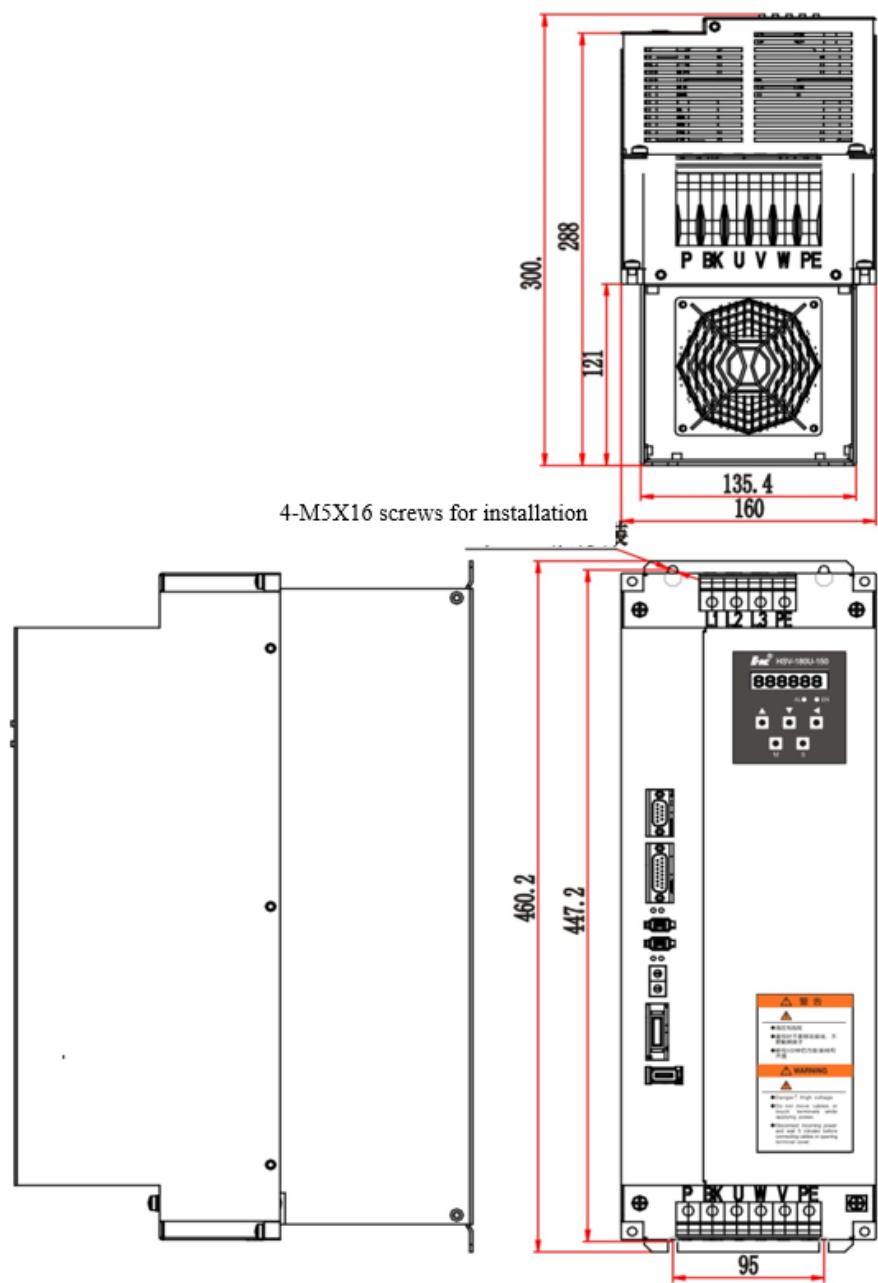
Dimensions of HSV-180US-100, 150 Spindle Drivers (unit: mm)
